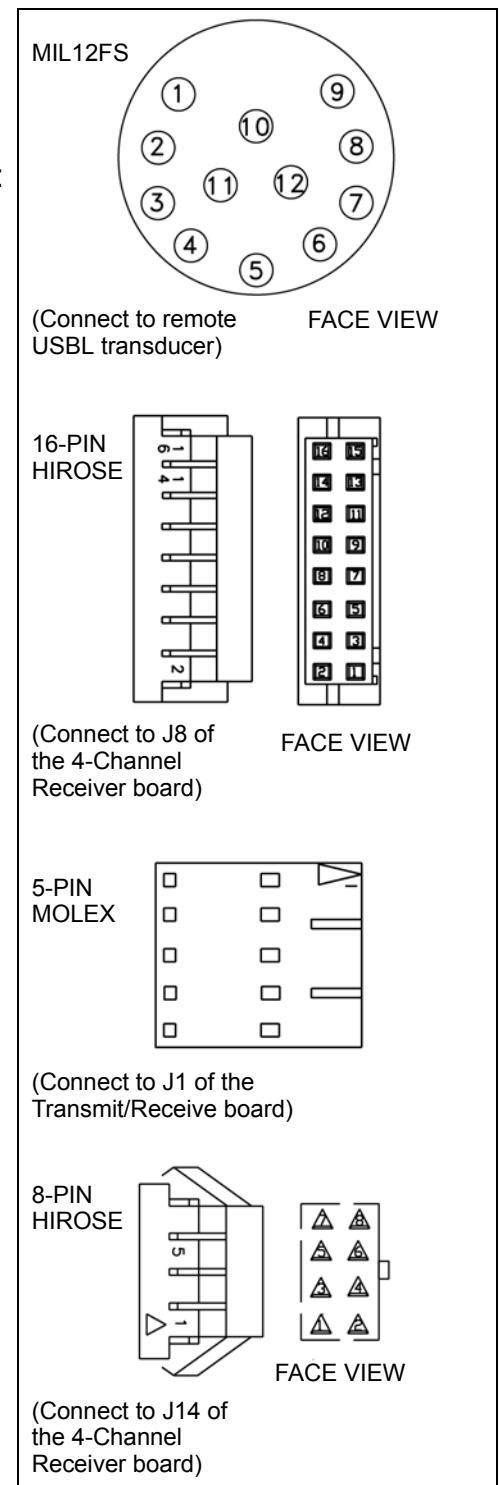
DAT-903 and DAT-993 Board Set Transducer Connection Cable Pigtails
